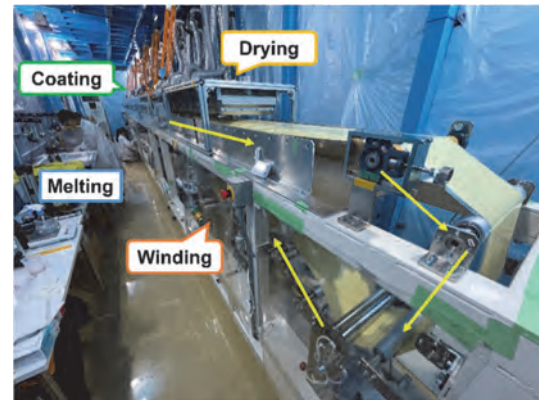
Overview of roll-to-roll coating machine in Nagoya University.
